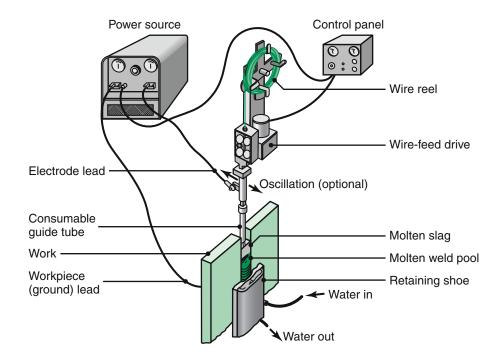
Equipment used for electroslag-welding operations.
